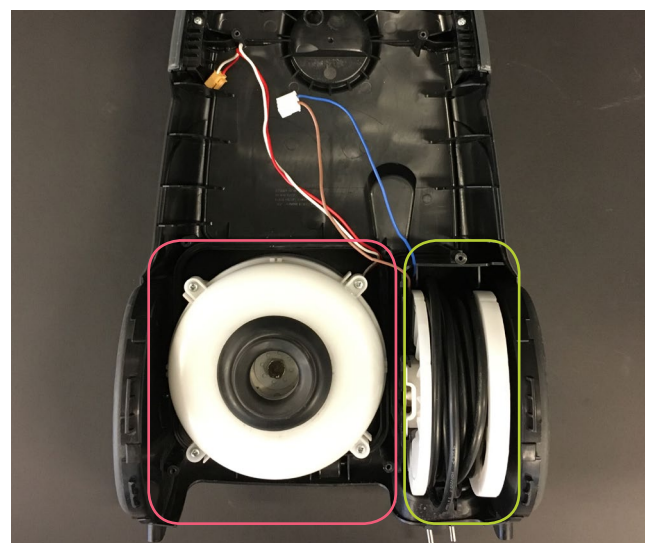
Independent disassembly of motor and cord-winder in Samsung SC8835
